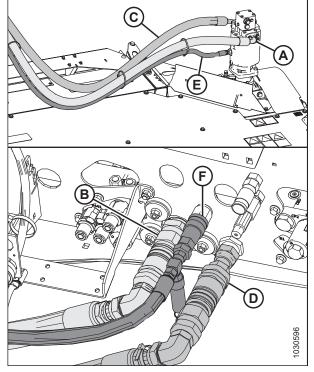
Hydraulics and Electrical – Rotary Disc Configuration with Quick Couplers Installed
